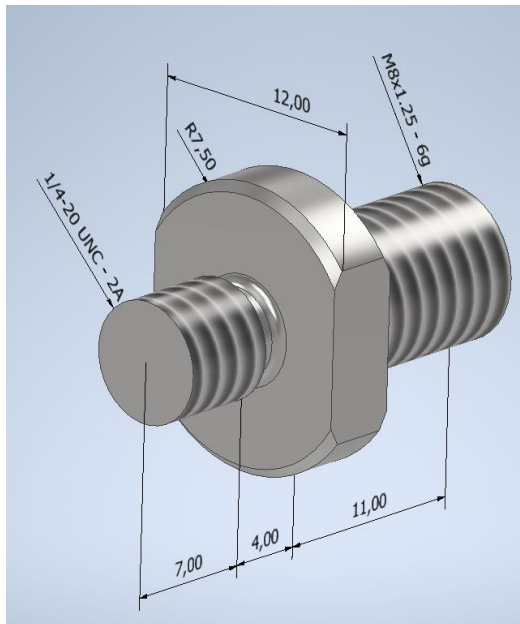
The adapter for M8x1,25 male thread to 1/4-20 UNC male thread.
